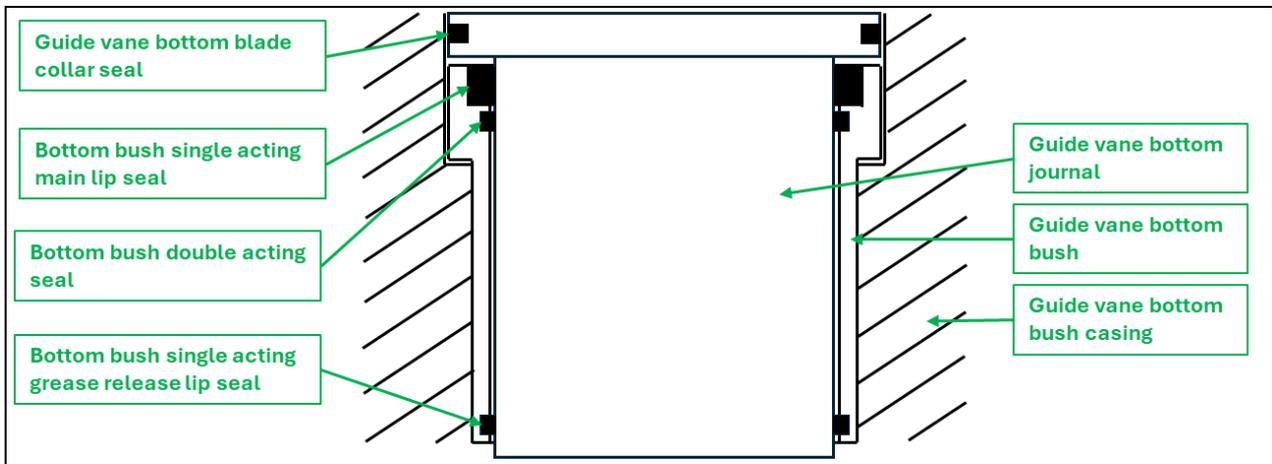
Guide vane bottom bush & journal assembly illustrating location of seals
